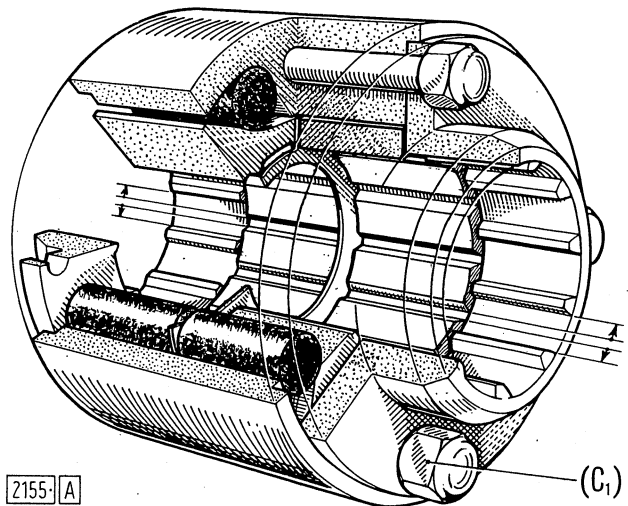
Phantom view of the clutch-transmission shaft coupling
